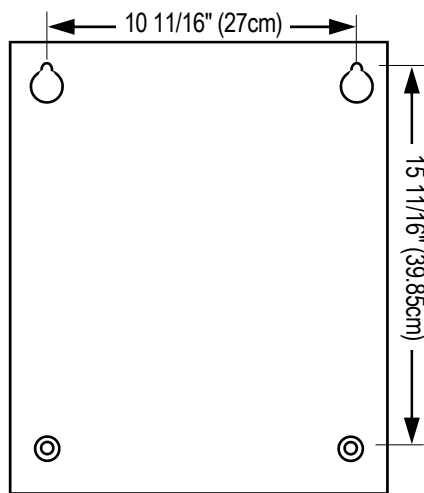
Expansion Unit Cabinet Mounting Hole Dimensions
